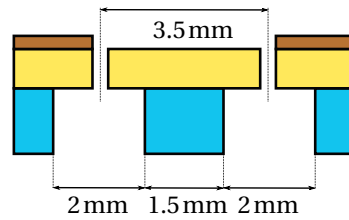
Cross-section of a small segment of the manifold (blue) and air bearing surface (yellow/brown). Double-sided tape bonds the manifold and air bearing surface. The inlets should be positioned at least 3.5 mm from each other.
